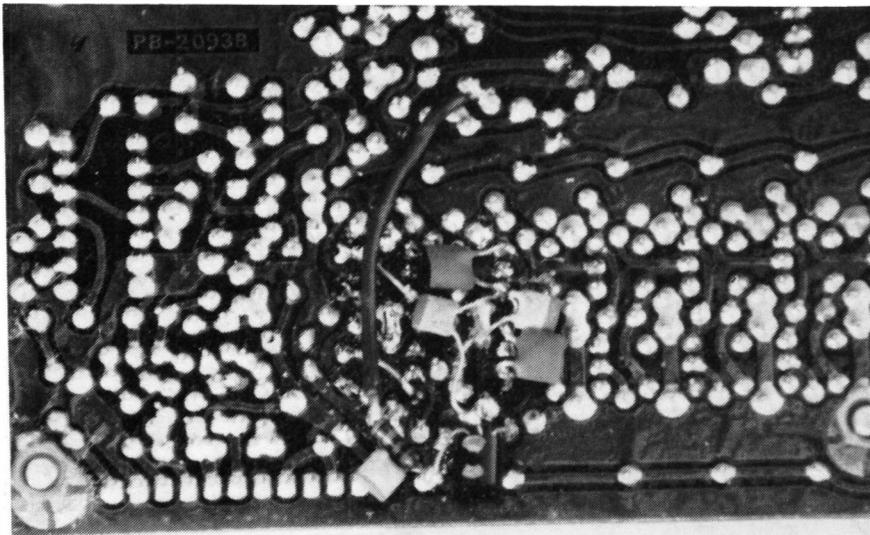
RF PCB LAYOUTS IN VICINITY OF T1009 AND T1023/T1024 AND REPLACEMENT COIL DETAILS
